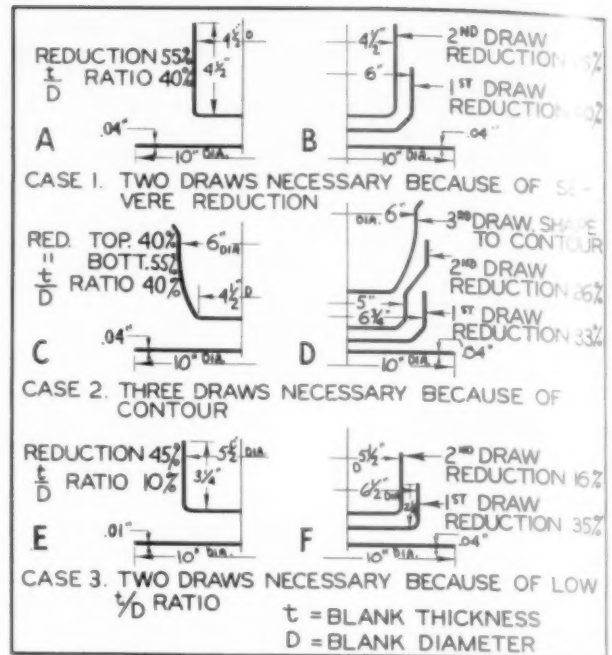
, showing three shells which would require redrawing for three different reasons. In case 1, a 10 in. diameter blank is to be drawn into a 4 1/2 in. diameter shell. Here, the  $t/D$  ratio is reasonably high and should be good for a limit draw. The reduction shown at A is 55% and, since recommended practice for aluminum specifies not more than 48%, the arrangement shown would be much too severe for one draw. A more practical arrangement is shown at B, in which a first draw to 6 in. diameter reduces the blank 40%. A redraw of 25% then brings the shell to the required diameter of 4 1/2 in. Case 2, a 10 in. diameter blank, to be drawn to a 6 in. diameter "shaped" shell is shown at C. The small diameter of the bottom of this shell creates a condition in which there is a substantial area out of control at the start of the draw if attempted in one operation. Shapes similar to this, in aluminum, must be drawn in two or more operations, and a suggested method is shown at D. Case 3, a 10 in. diameter blank to be drawn to a 5 1/2 in. diameter shell is shown at E. The blank is .010 in. thick and the  $t/D$  ratio is quite low, necessitating a lower initial reduction. The reduction from 10 in. to 5 1/2 in. is 45%, which is well within the 48% suggested as an outside limit for the common alloys of aluminum. However, it is too severe for a blank having a  $t/D$  ratio of .10, and a suggested method is shown at F.
